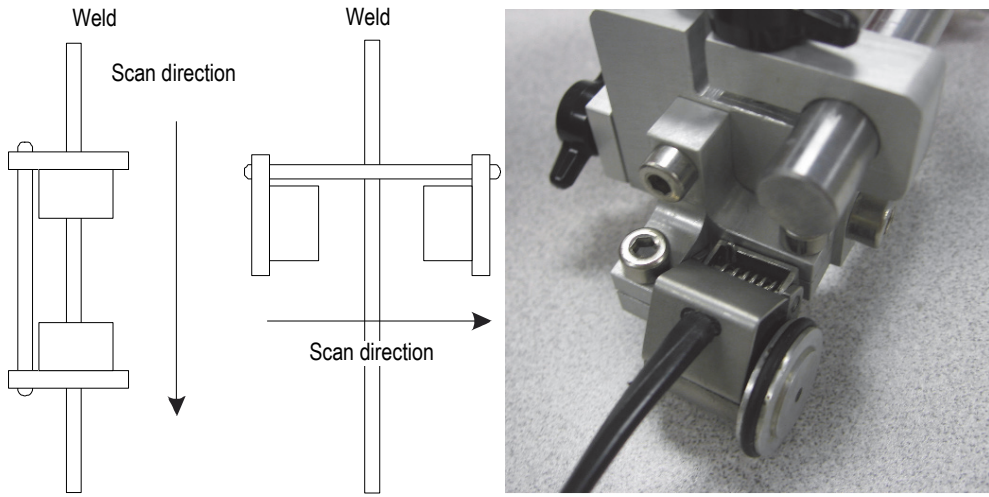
The Mini-Wheel encoder installed on the inside of the encoder holder
